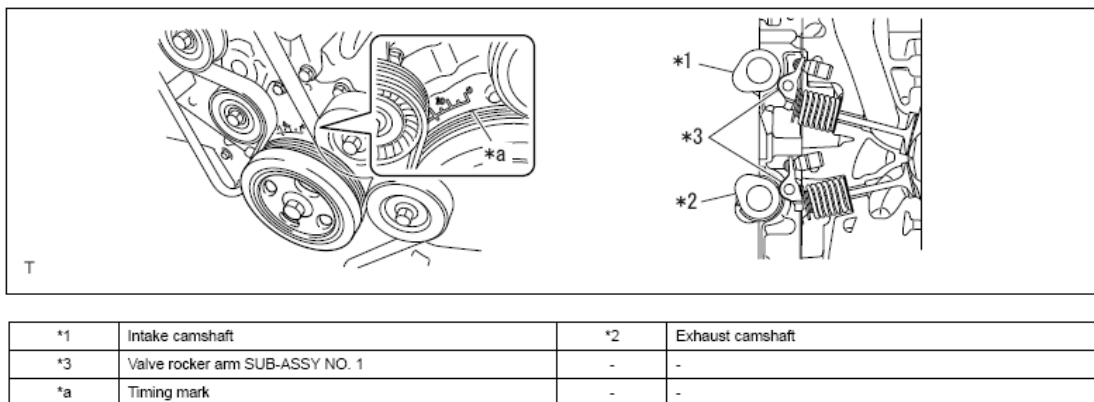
Identifying Intake And Exhaust Camshaft, Valve Rocker Arm Sub-Assembly No. 1 And Timing Mark
